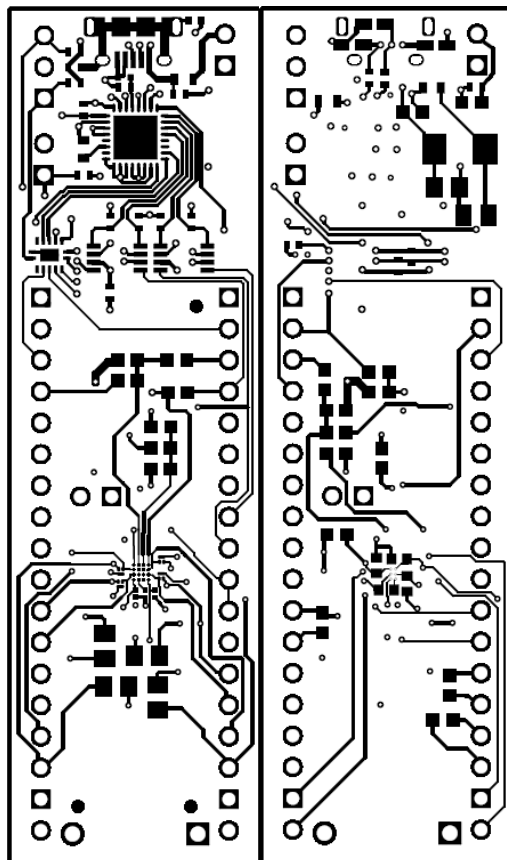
DAC63004WCSP-EVM PCB Layers
